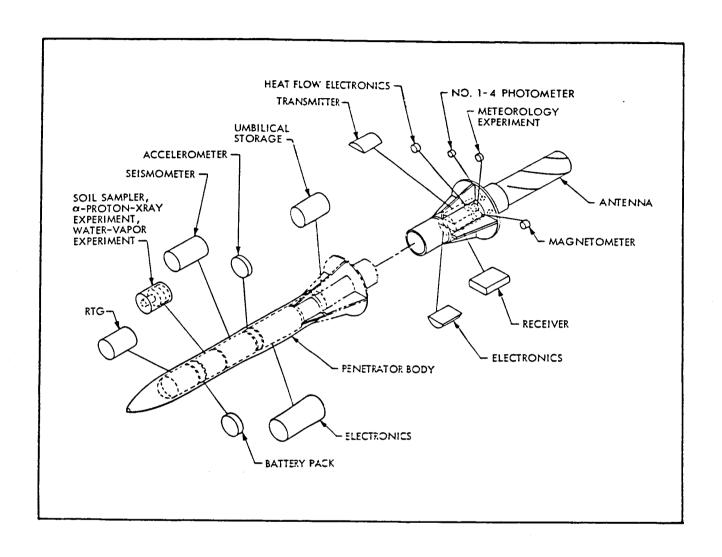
Penetrator Vehicle (NASA/Ames Drawing)
